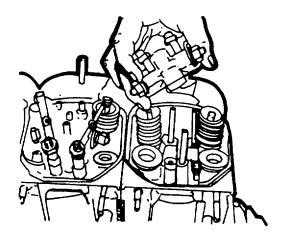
Installing Push Rods/ Mount Rocker Arm Shaft Support
